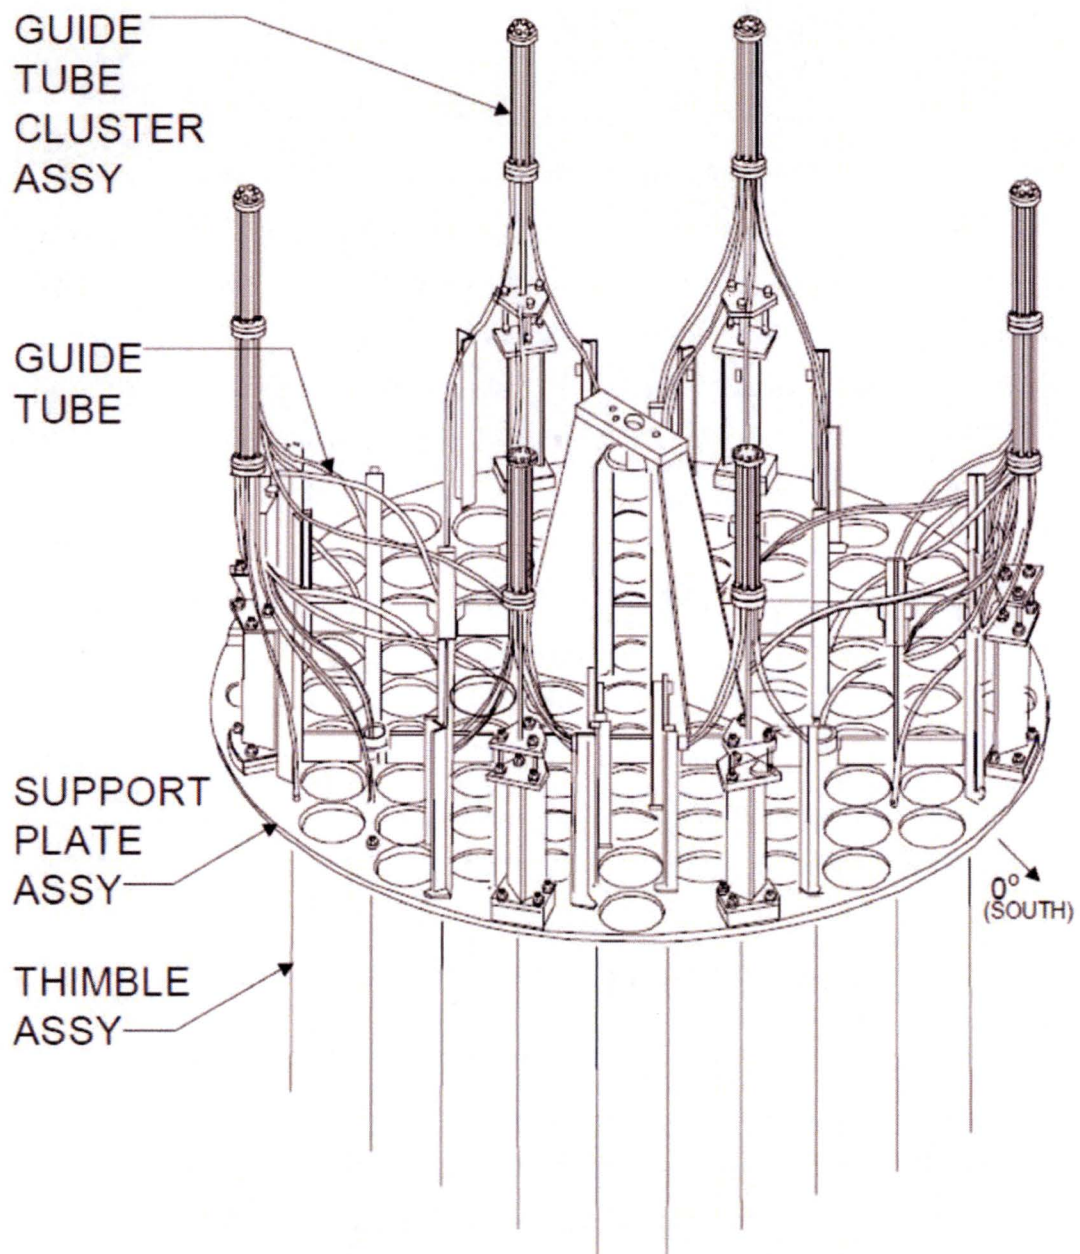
In-Core Support Assembly [12, Figure 4.1-8a]
